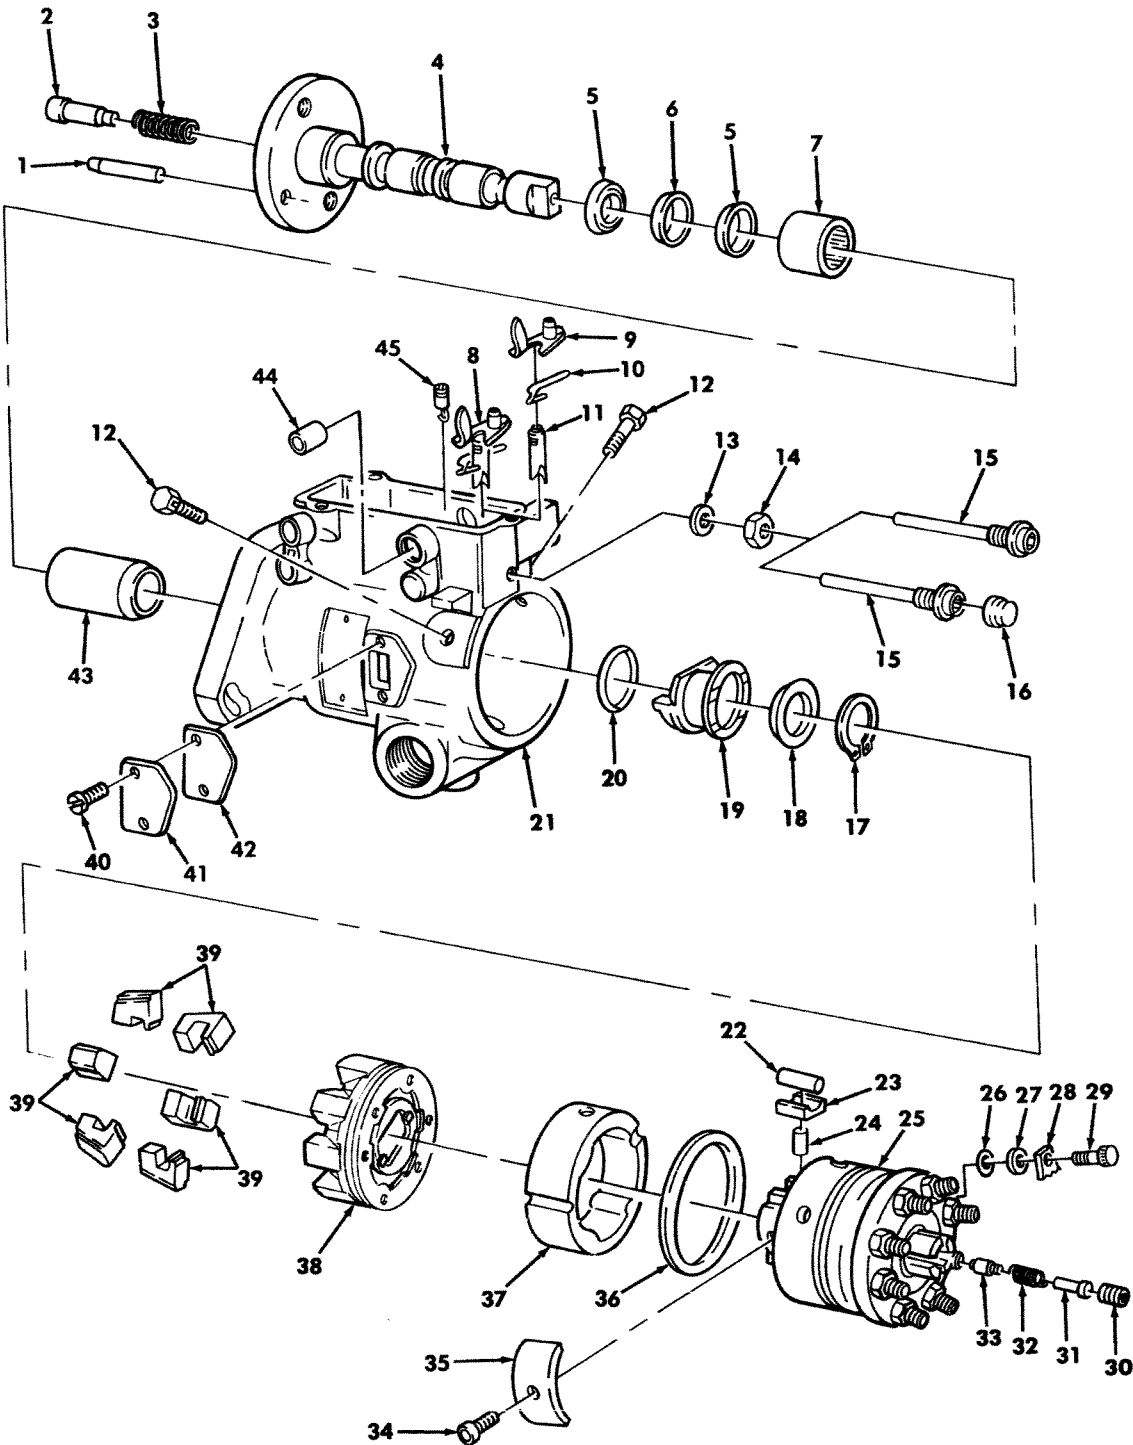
Fuel Injection Pump Housing, Head and Rotor, Drive Shaft, and Related Parts.
